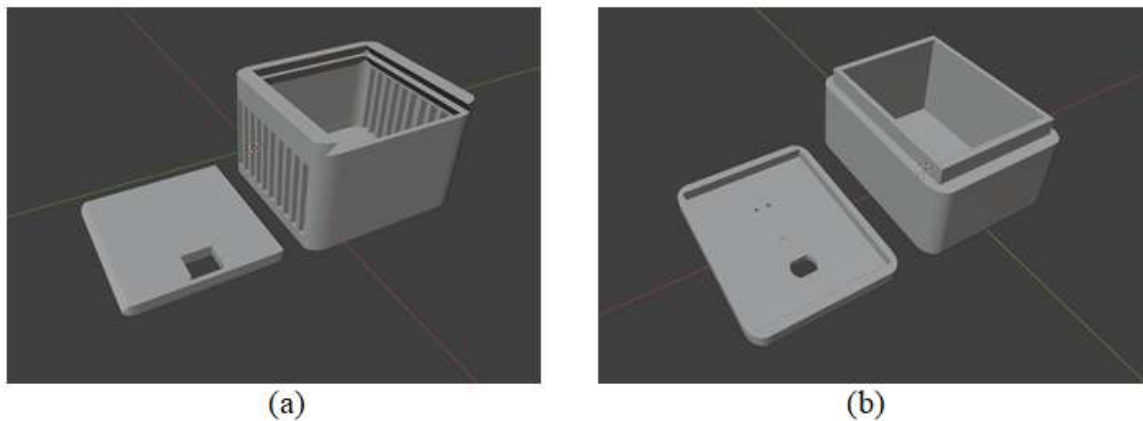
3D Enclosure Designs: (a) Transmitter Prototype, and (b) Receiver Prototype
